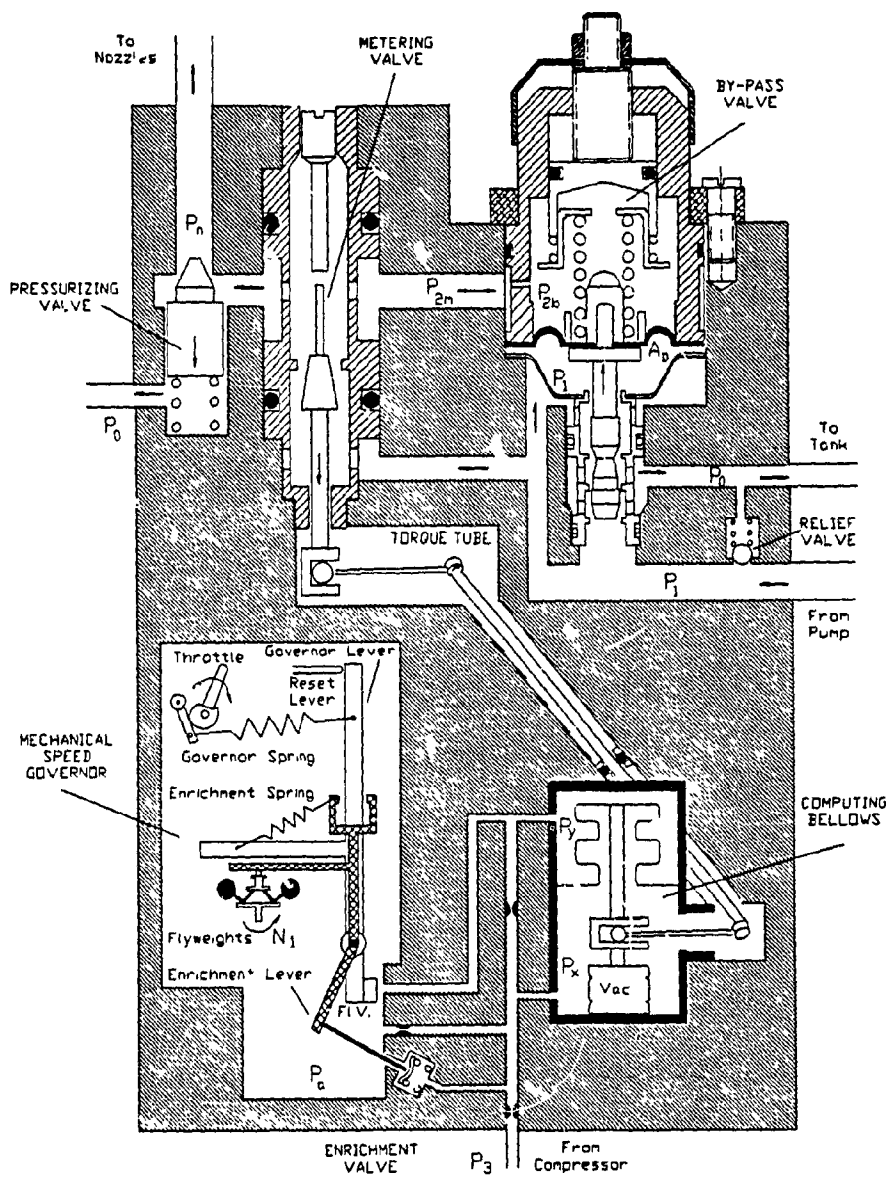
Main components of the Bendix DP-F2 fuel control unit
